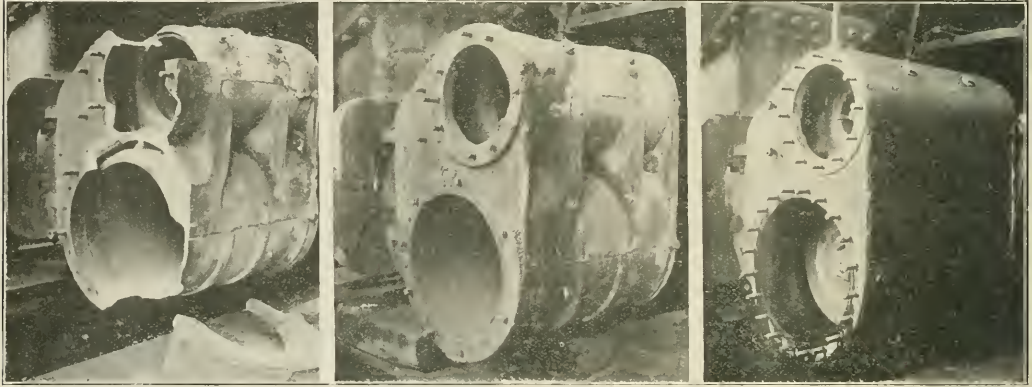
Views of Cylinder Before and After Welding—Reading Shop Men Are Proud of This Job
